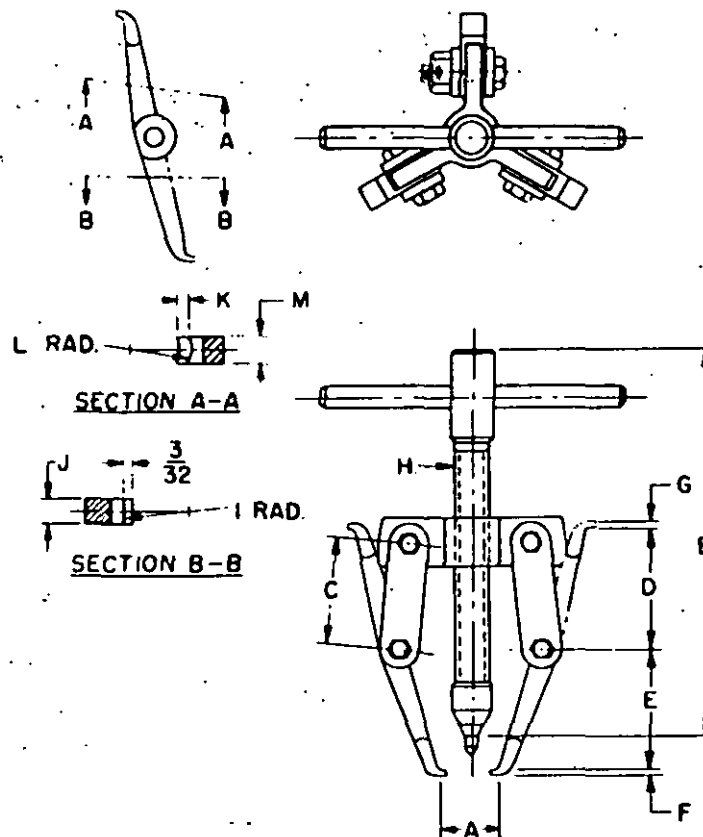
Type II, puller, mechanical, bearing, three-jaw, double end grip, aircraft electrical accessories.
